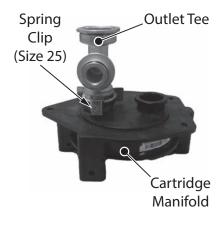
Remove spring clip from outlet tee and cartridge manifold
